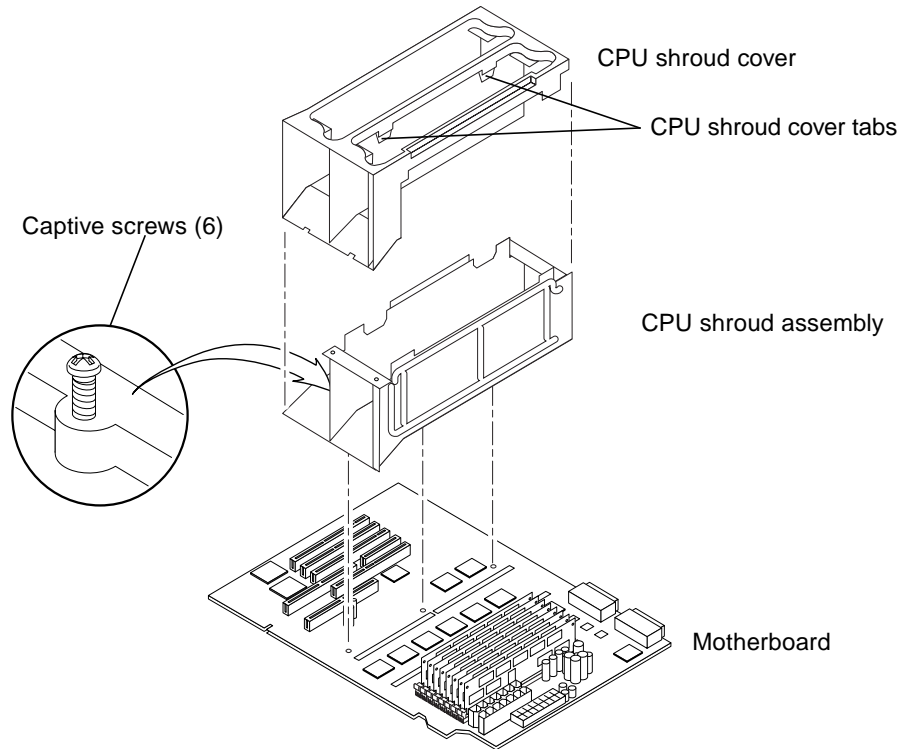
Removing and Replacing the CPU Shroud Assembly
